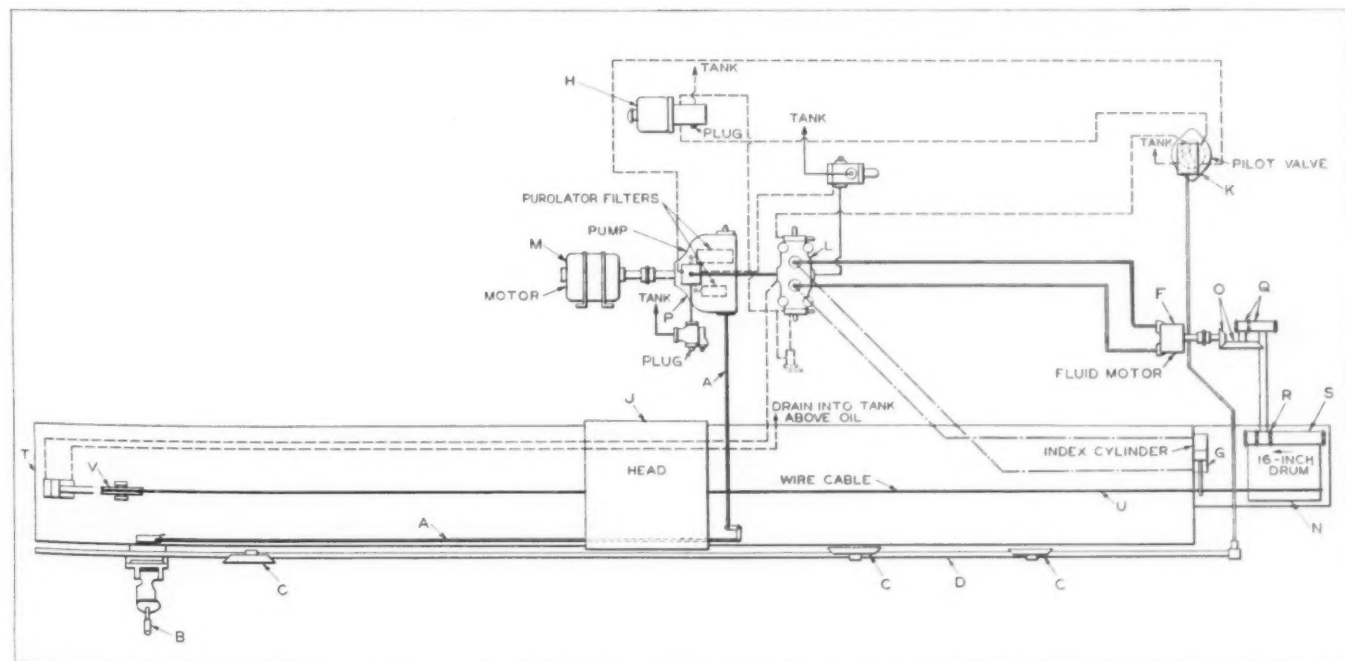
Hydraulic Circuit of a Horizontal Honing Machine Built by Barnes Drill Co.
